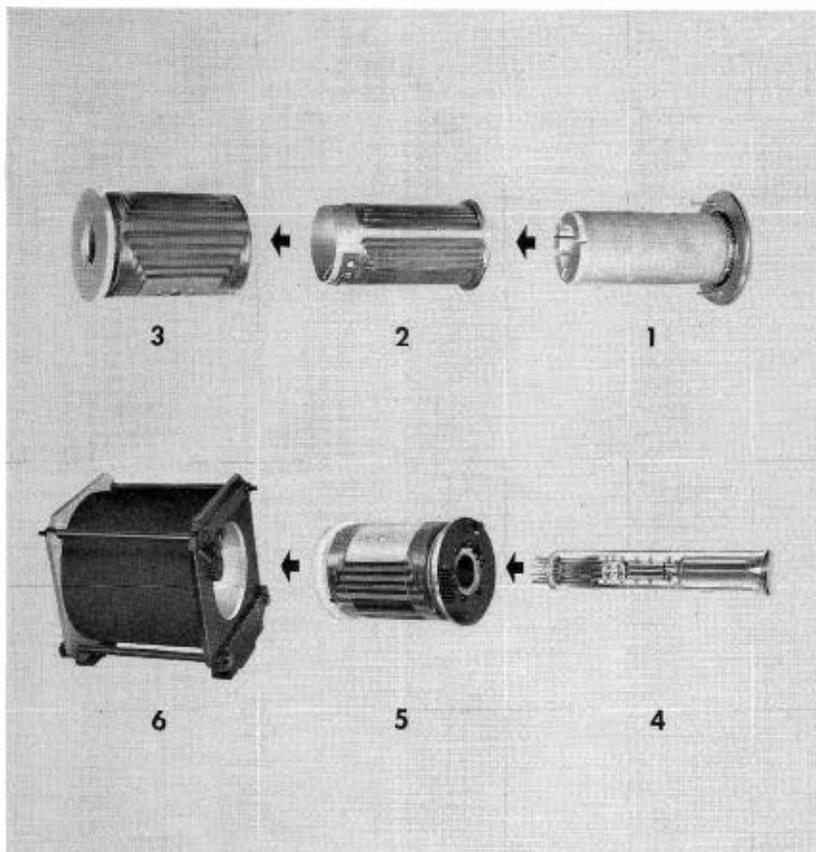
Precision deflection assembly for Vidicon that assures accurate registration of images. (1. Mandrel assembly, 2. Horizontal deflection coil assembly, 3. Vertical deflection coil assembly, 4. 6326 vidicon tube, 5. Yoke assembly, 6. Focus coil assembly. Item 5 is made up of items 1, 2 and 3. Items 5 and 6 constitute a deflection assembly.)
